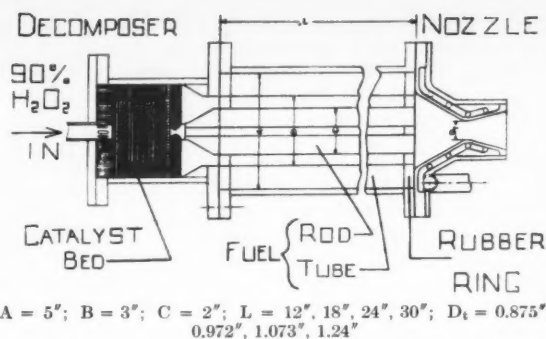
Combustion and fuel chamber. Assembly of typical hybrid engine with rod-and-tube fuel charge
